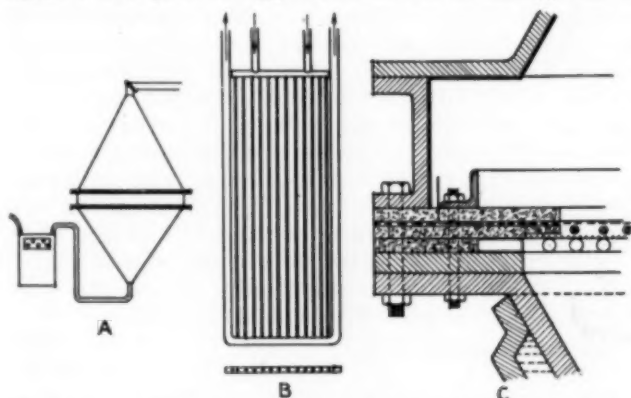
A. GENERAL ASSEMBLY. B. COPPER WATER COOLER. C. DETAIL OF ASSEMBLY
